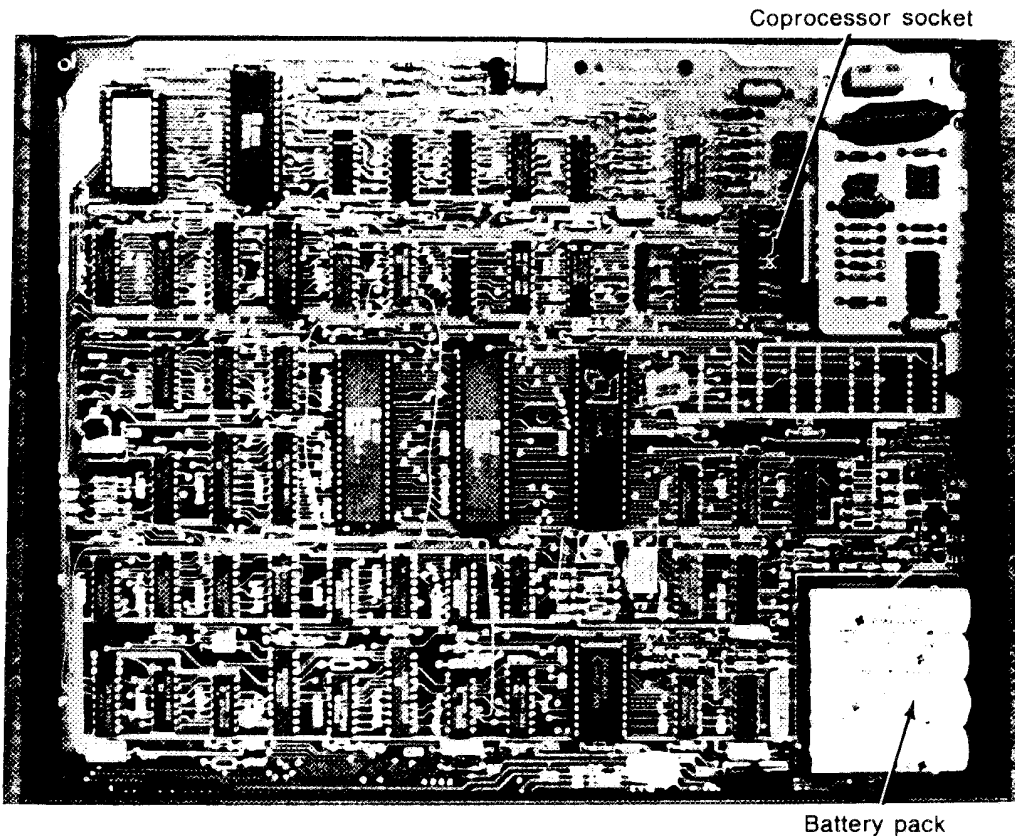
The Lisa I/O card. Note the battery pack (lower right) and the AMD 9512 coprocessor socket (upper right).
